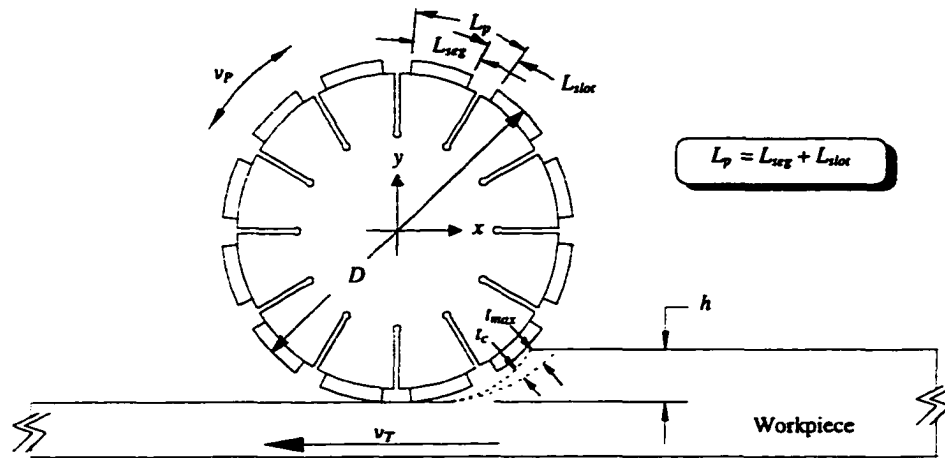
Diamond Blade Cutting System. This figure illustrates the slotted steel blade, diamond segments, and the workpiece material.
